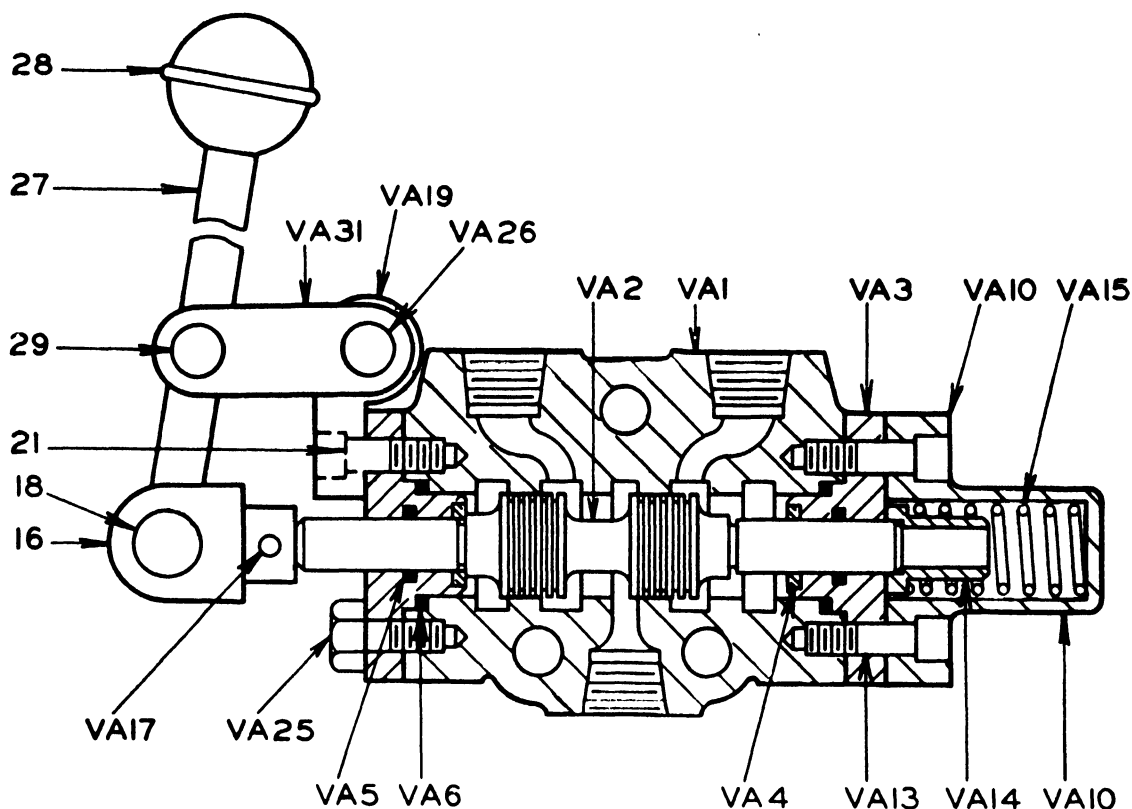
Spring-offset valve. (Hydro-Power Inc., Mount Gilead, Ohio.)
